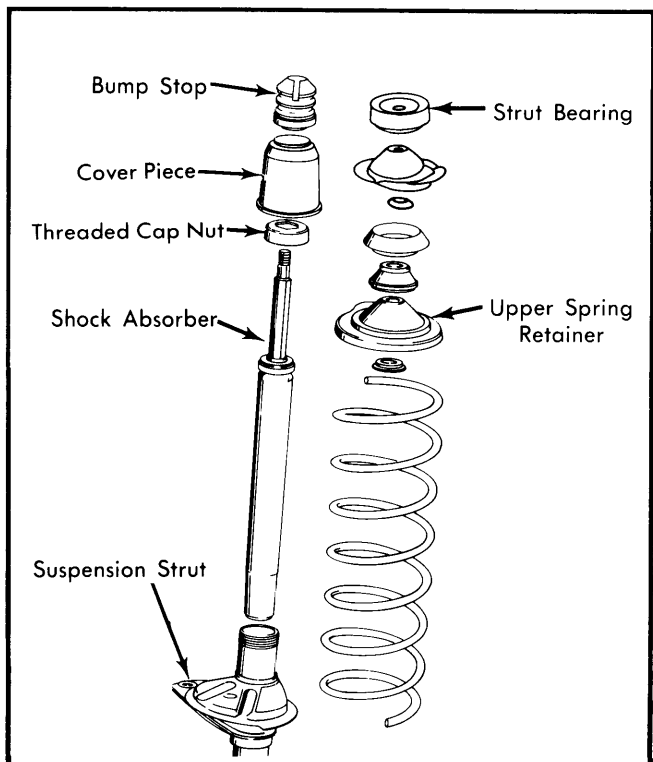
Disassembled View of Strut Assembly (4000 Shown; 5000 Similar)
